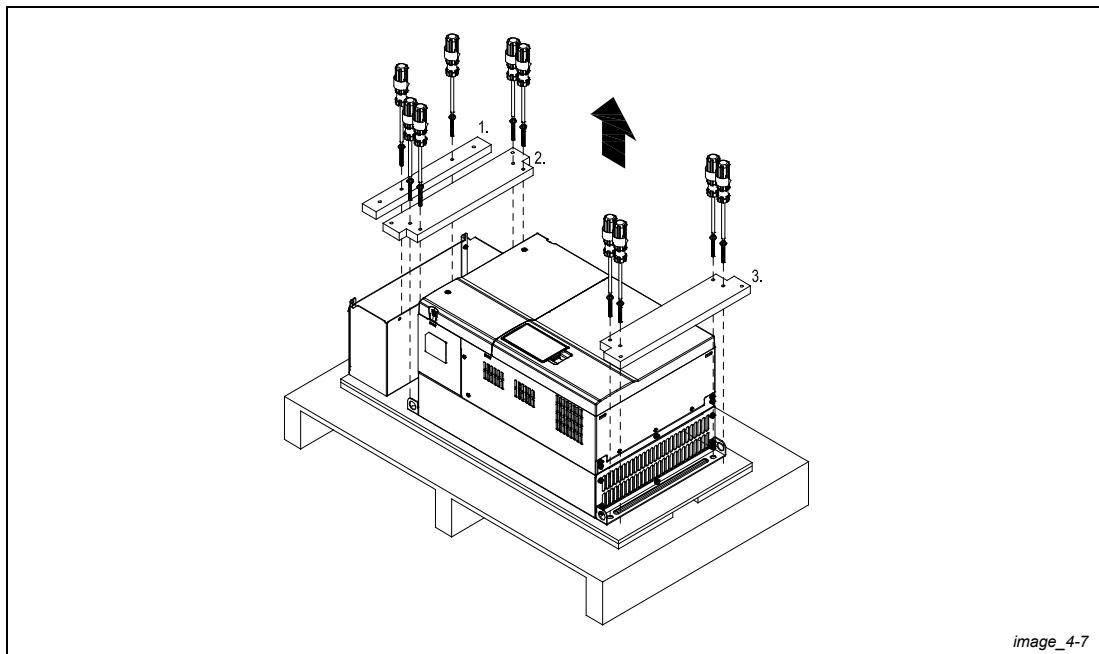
Unpacking inverters of frame size D, Crate 2 (3)
